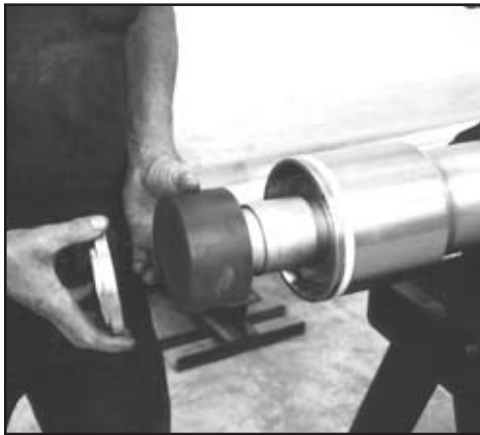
REMOVE SEAL RING AND ELASTIC BLOCK
